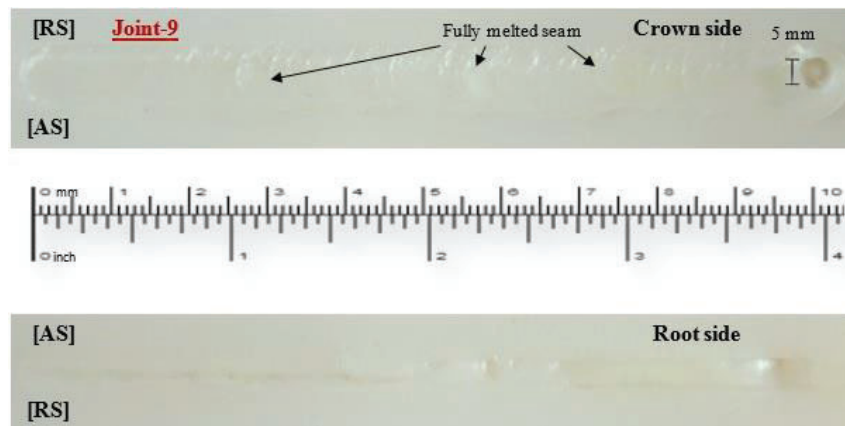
Joint-9 material flow, surface finish, and surface defects
